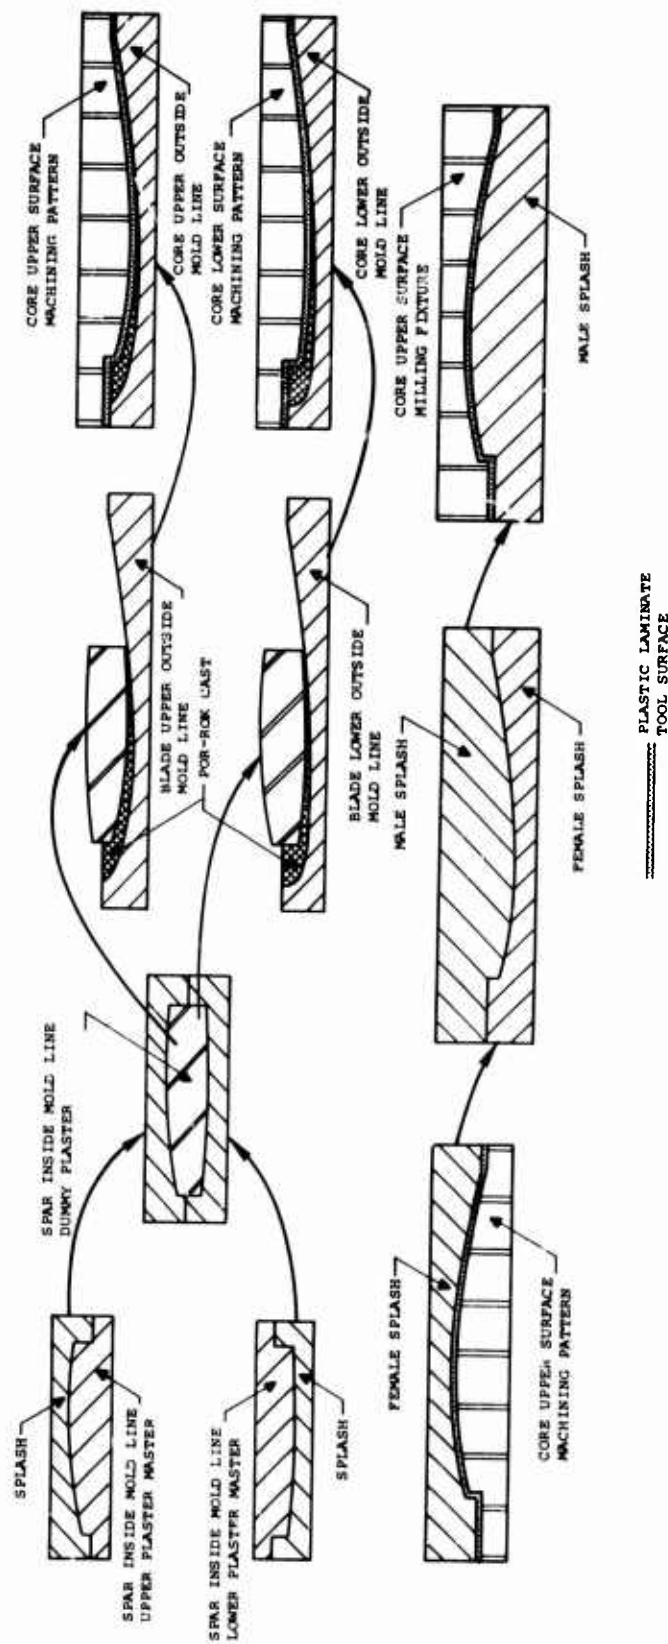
Schematic Diagram of Tooling Transfers to Make Core Machining Patterns and Core Milling Fixture.
